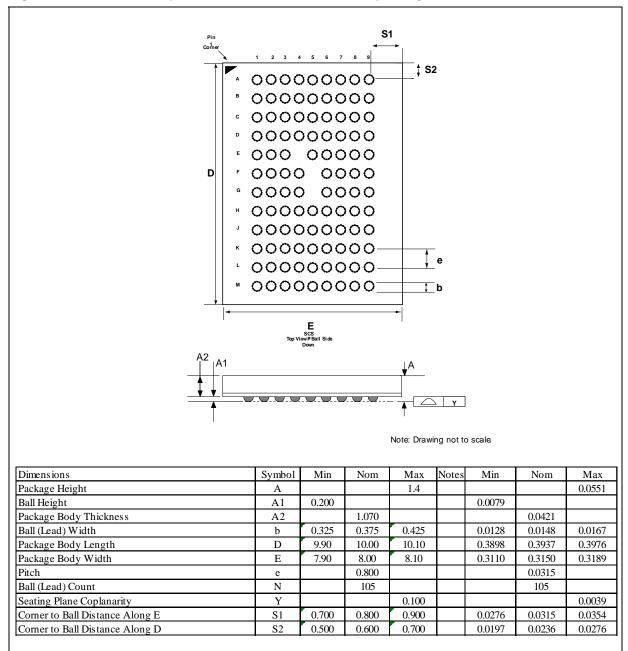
Mechanical Specifications: x16D (105-ball) package (8x10x1.4 mm)
